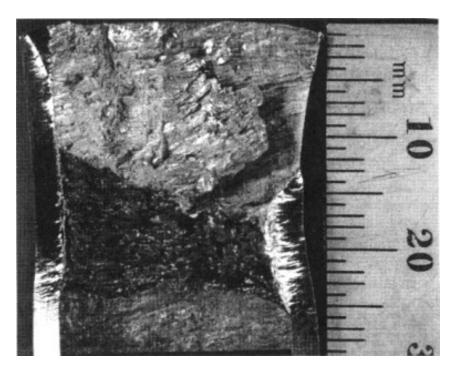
Fracture surface of unaged weld metal PWCE tested at 290°C
